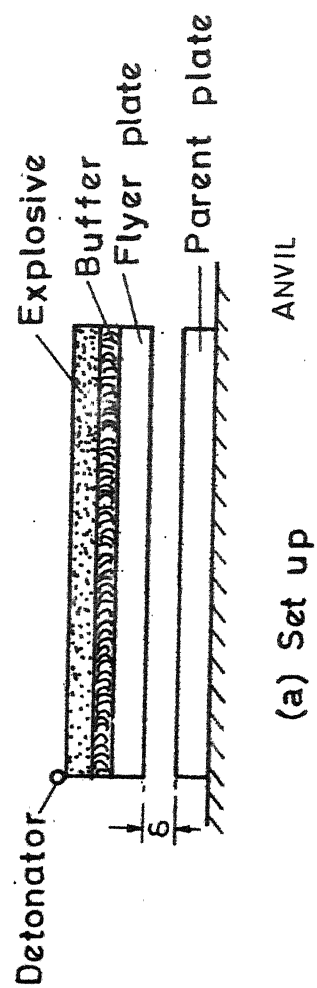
A PARALLEL ARRANGEMENT FOR EXPLOSIVE WELDING
